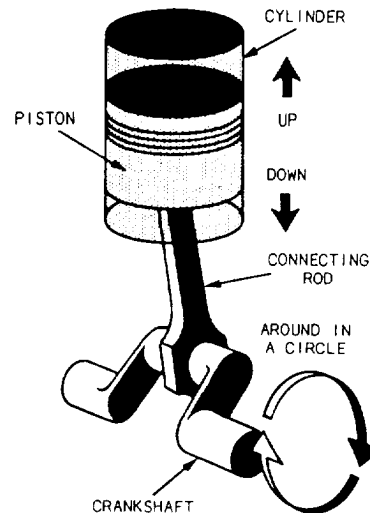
Cylinder, piston, connecting rod, and crankshaft for one cylinder of an engine.
